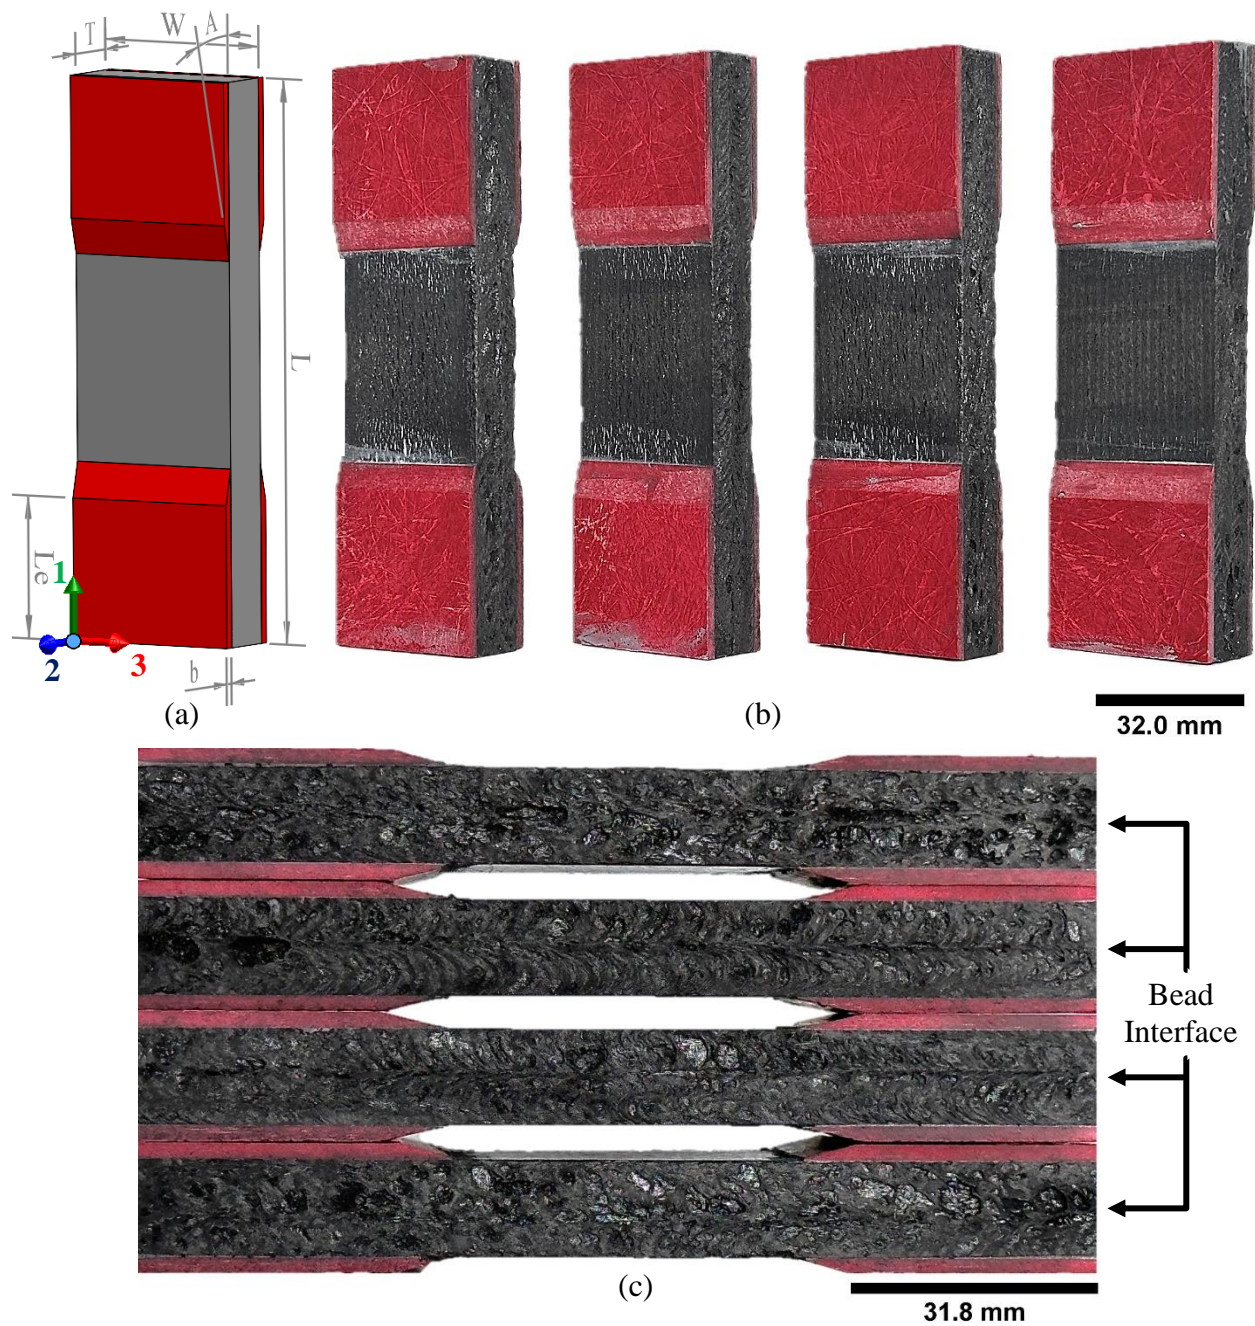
(a) CAD model with local/material coordinate system & reference dimensions, (b) isometric view, (c) and side view showing the bead interface noted in Figure 2.1c of the tension-loaded C/C coupons.
